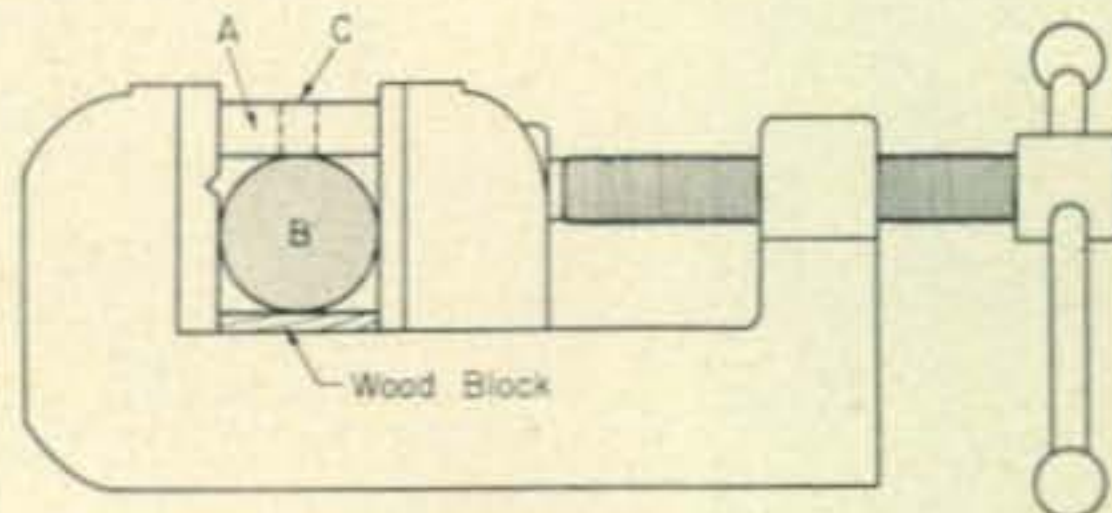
Use of a guide for accurately drilling hole through the diameter of rod or tubing. The guide, A, is made of $\frac{1}{4}$ " to $\frac{1}{2}$ " thick piece of round or square metal equal to the diameter of the rod, B, which is to be drilled. A hole, C, of the desired size is drilled through the center of A and is used to center and guide the drill when the parts are held in the vise as shown. A particular tool (Center-Tru Jigger) designed for this operation is also available. See "Special Tools."
